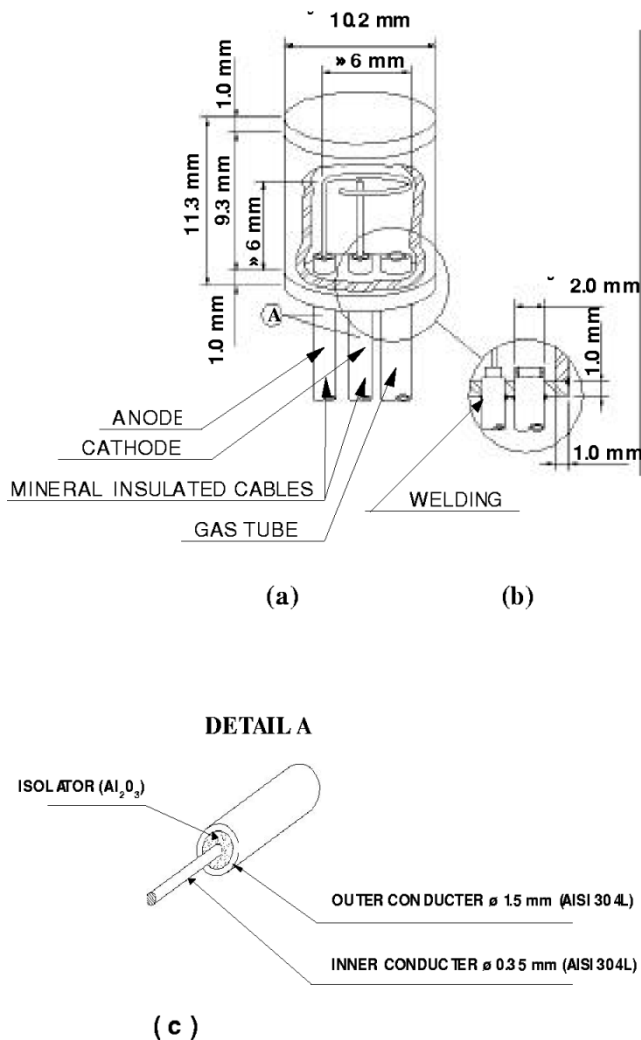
(a) Schematic drawing of the developed chamber. (b) Expanded view of the cables and gas tube welding. (c) Mineral insulated cable detail.
